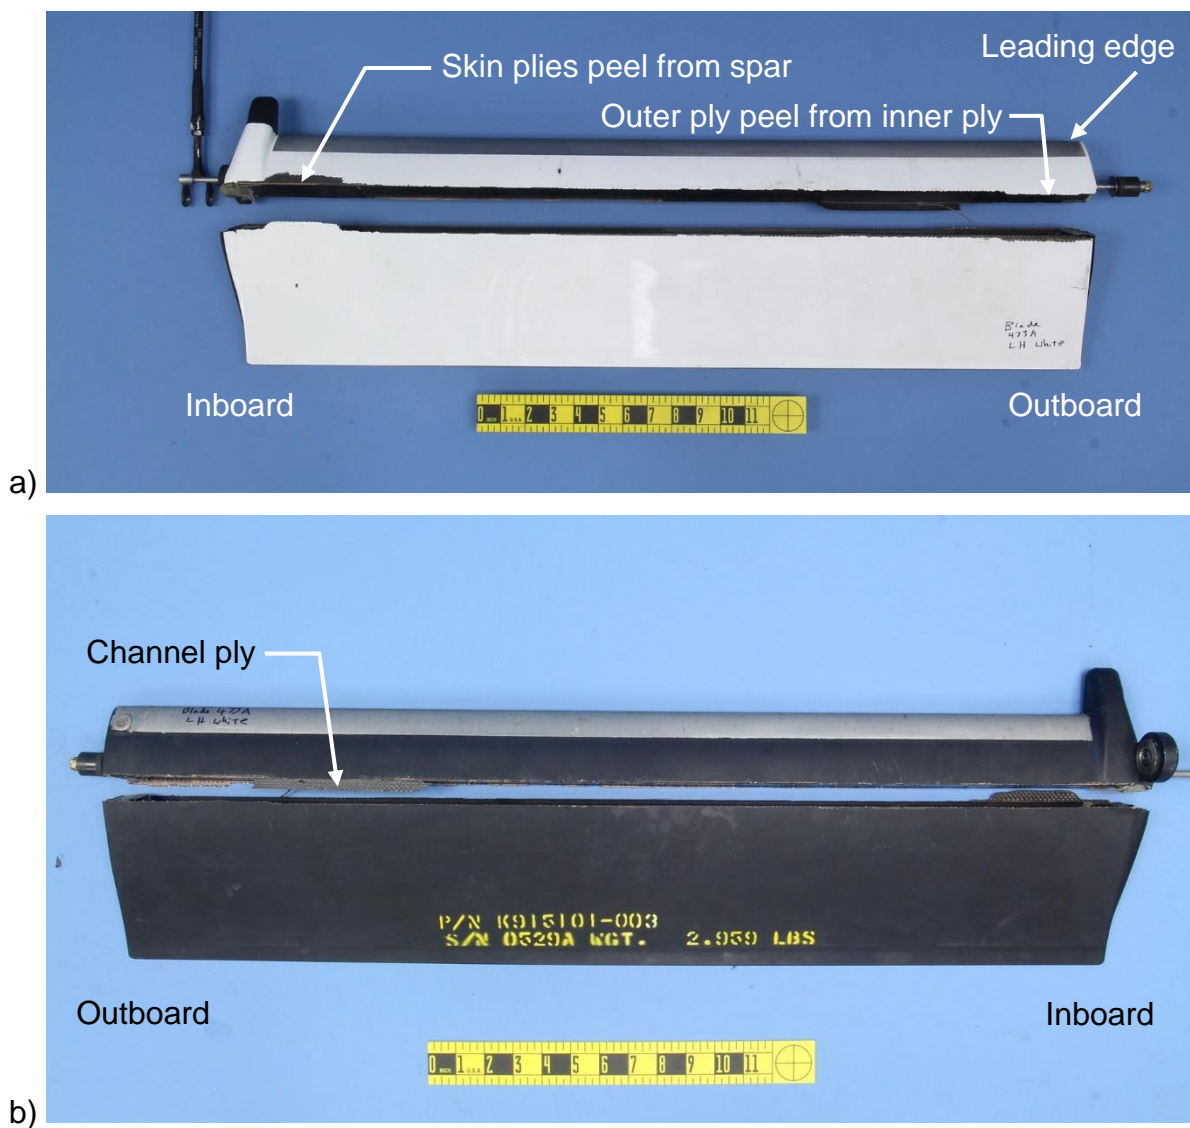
Separated servo flap assembly from the left rotor / white main rotor blade (LHW - Blade 473A), as received: a) view of the flap upper side and b) view of flap lower side.
